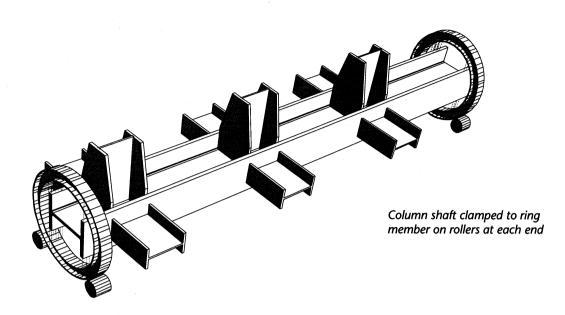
Column manipulator for welding beam stubs to columns
